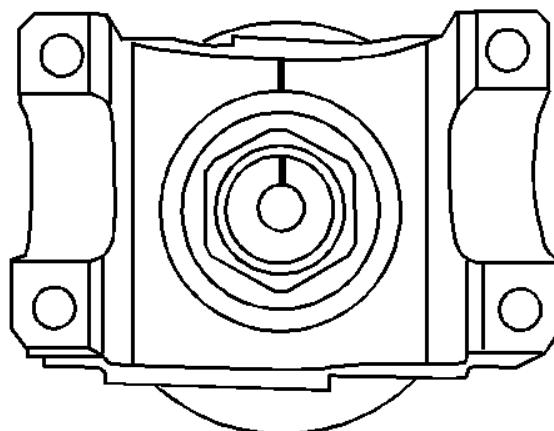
Pinion Shaft And Pinion Yoke Alignment Marks
